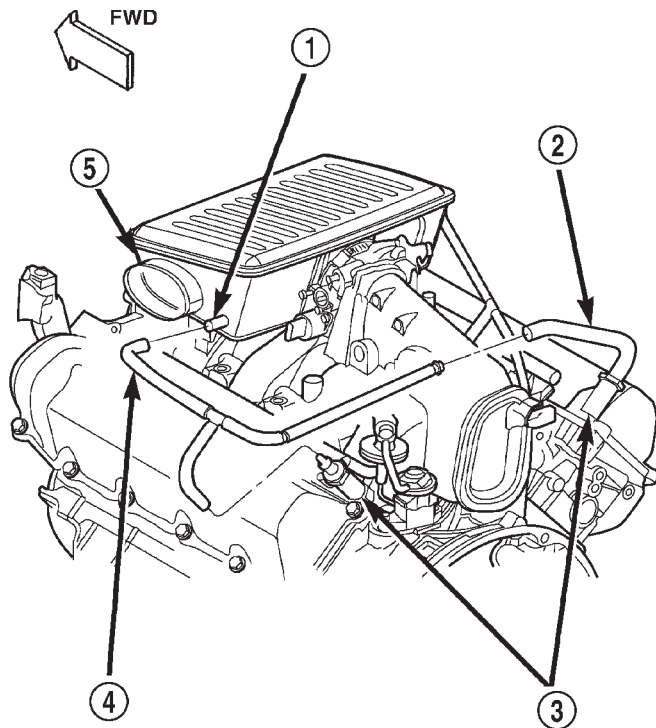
PCV Valve/Oil Filler Tube—4.7L V-8 Engine
